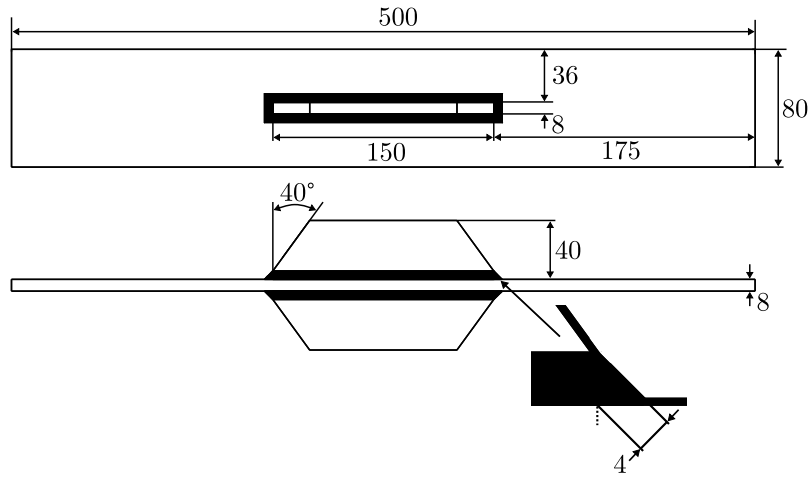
Dimensions (in millimeters) of the investigated stiffener structures.
